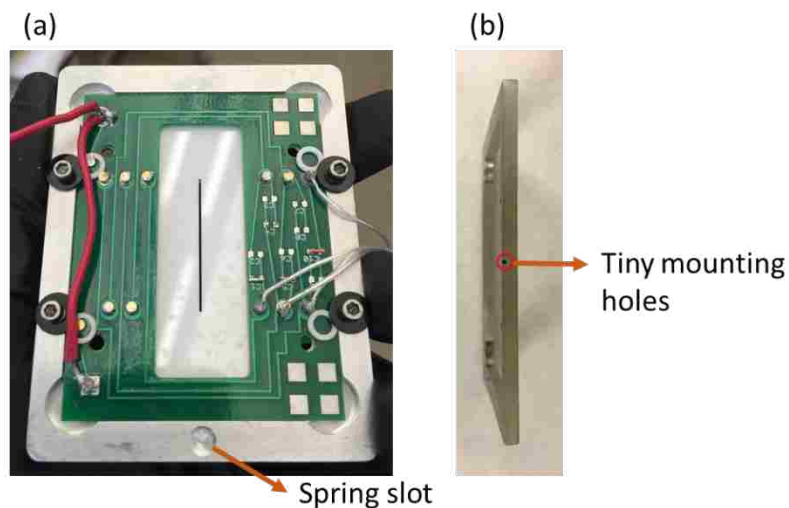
(a) Front view of the new plate holder loaded with ceramic plates and PCB; (b) Side view of the new plate holder.
